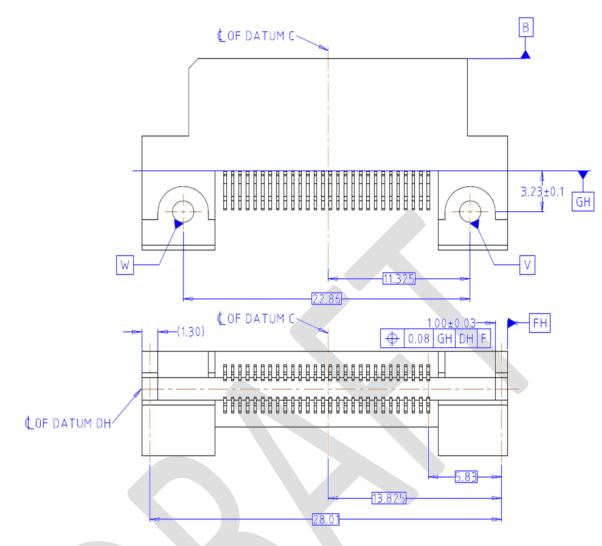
1C STRADDLE MOUNT CONNECTOR DIMENSIONS - REAR VIEW (MM)
